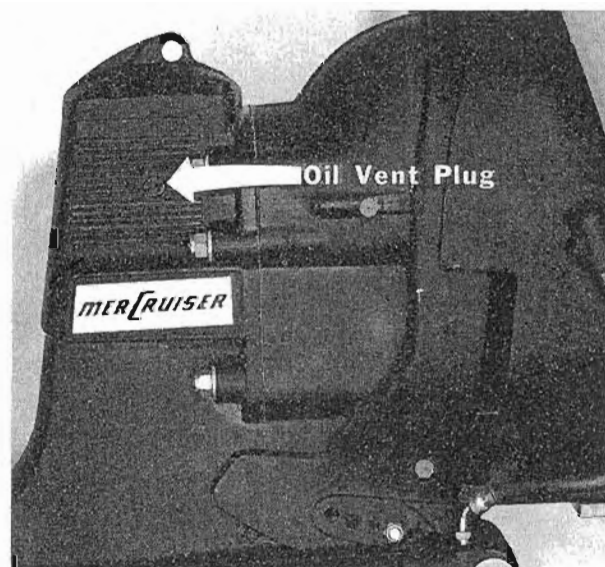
Oil Vent Plug in Upper Gear Chamber
